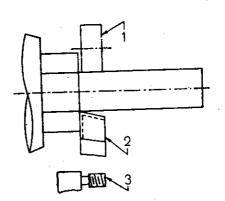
Setting of box turning tool 1. Roller, 2. Turning tool, 3. Position of stop rod.
